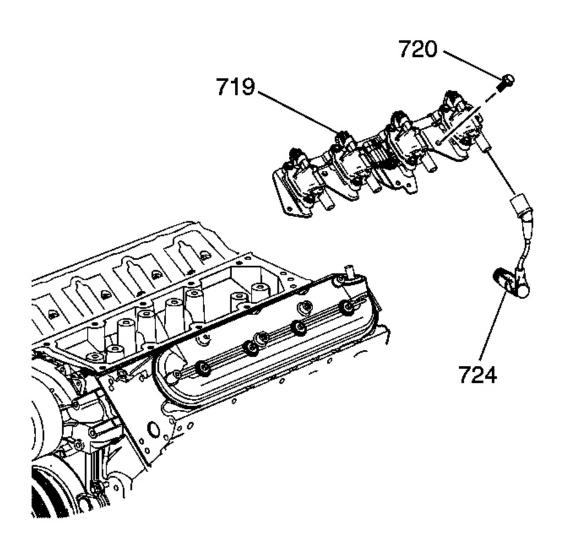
Valve Rocker Arm Cover Replacement - Left Side Courtesy of GENERAL MOTORS CORP.
